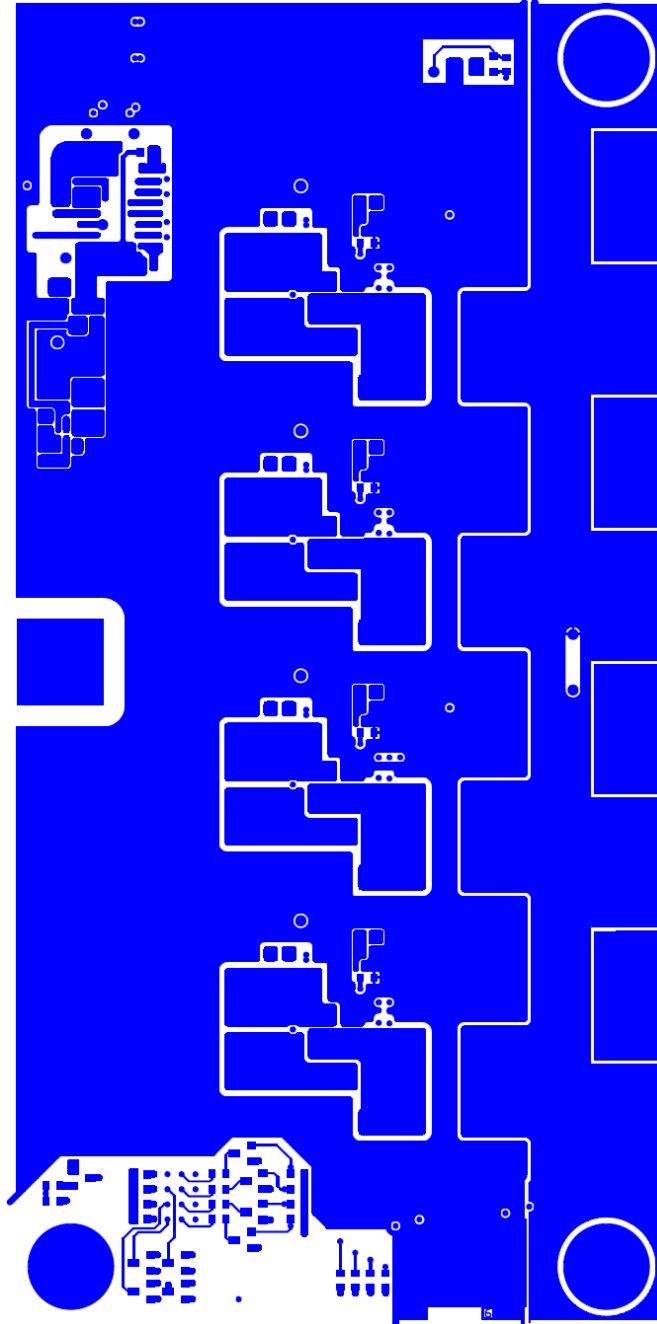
PCB design of bottom layer corresponding to the test board of Figure G.3.1.
